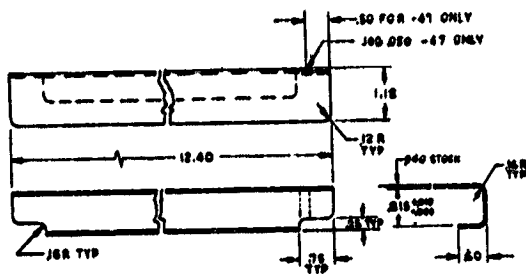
Bottom View of TPSTF Array Holding Fixture (134036B)
